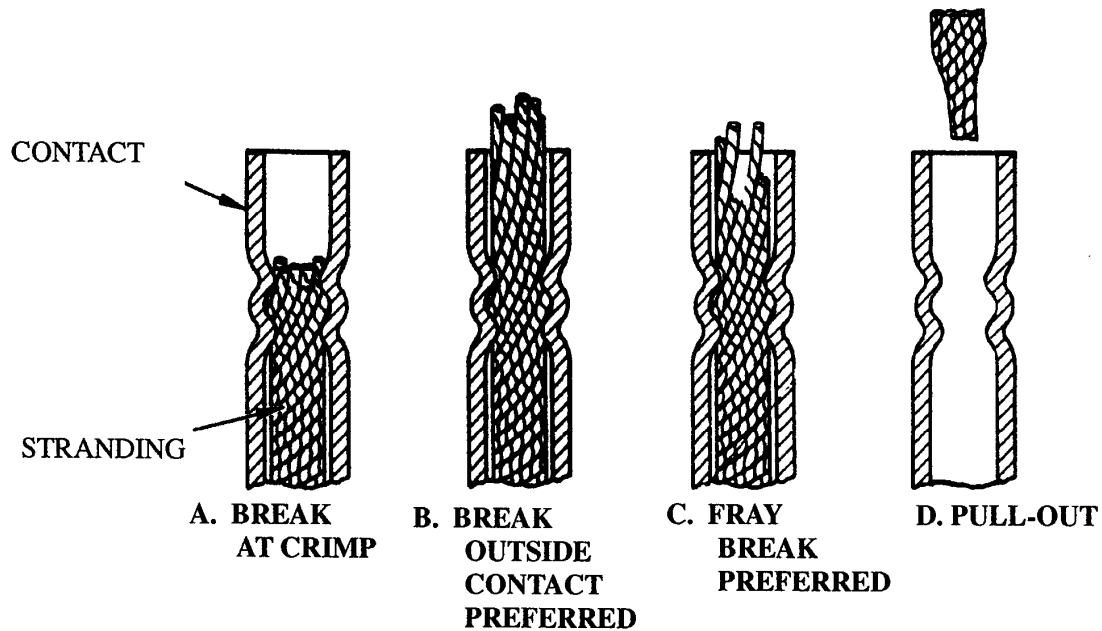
Crimp Joint Tensile Failure Categories
